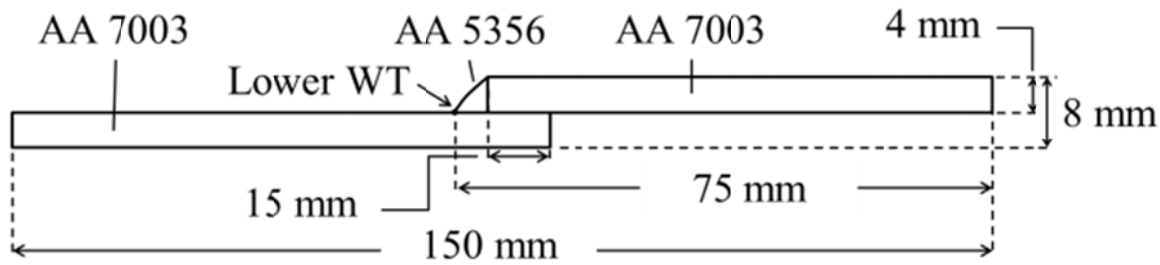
Schematic of a welded specimen (dimension into page: 25 mm).
